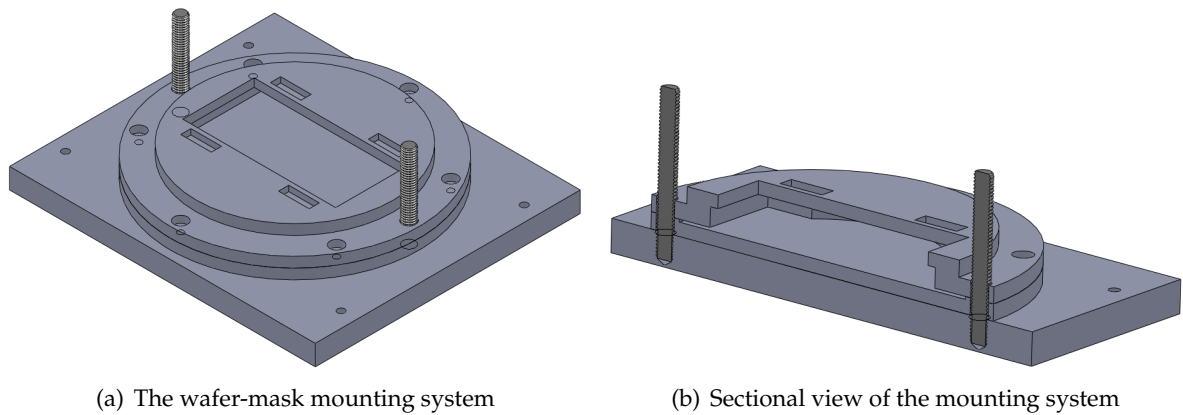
The wafer-mask mounting system for rectangular masks. The adapter plate at the bottom enables the mounting of the system at the wafer stepper carriage. Four strong magnets are embedded in the cavities at the top side of the mask fitting to ensure a mask fixing.
